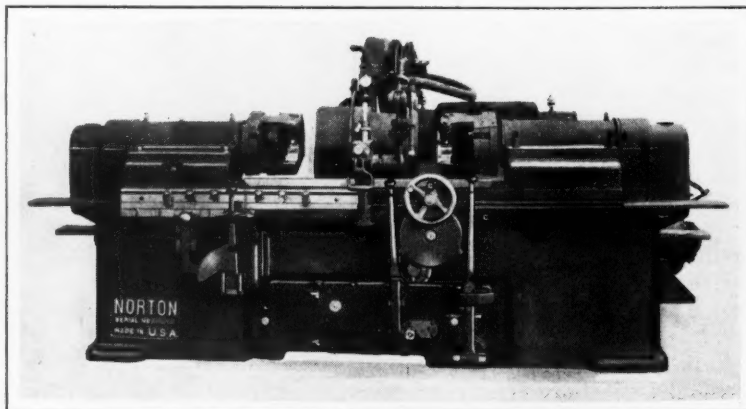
Norton Double-head Crankpin Grinding Machine with Hydraulic Control
